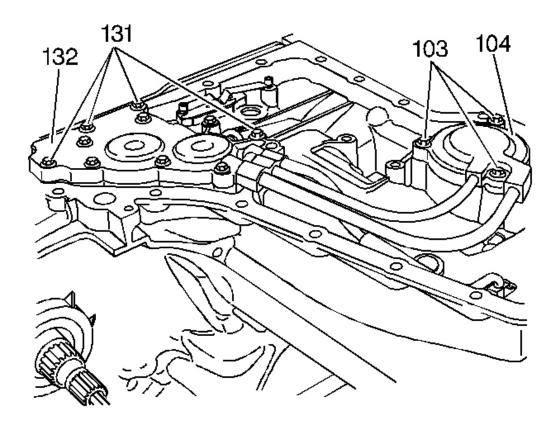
Removing Accumulator Cover & Manual 2-1 Band Servo Cover Bolts Courtesy of GENERAL MOTORS CORP.
